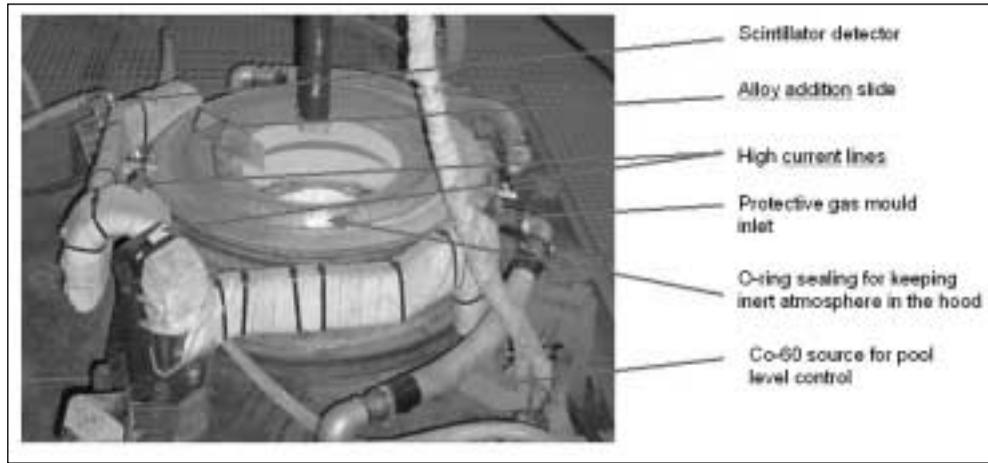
The complete mould assembly during CC-ESRR® process.
